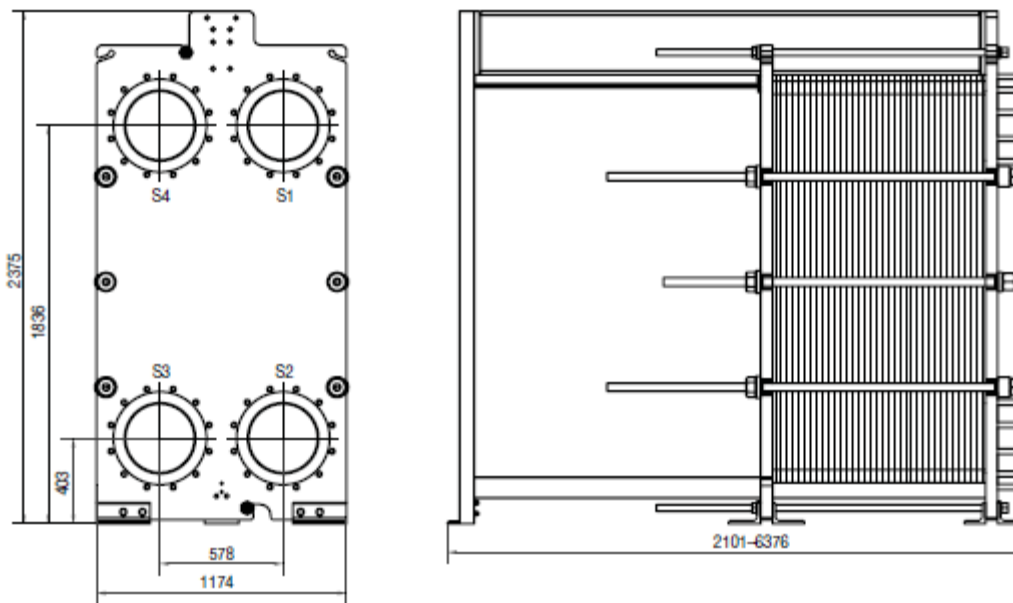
dimensional drawing of gasketed plate type eat exchanger
